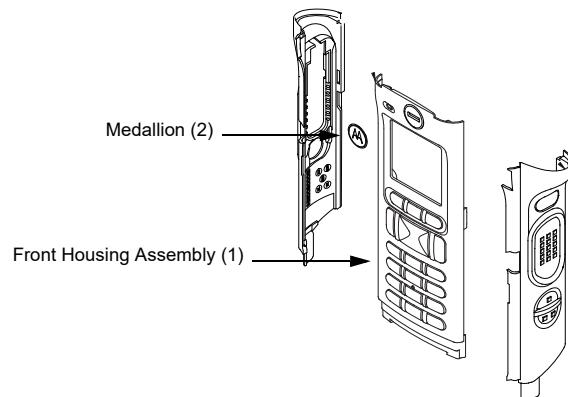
Main Housing Assembly (Dual Display Version, Full Keypad)
